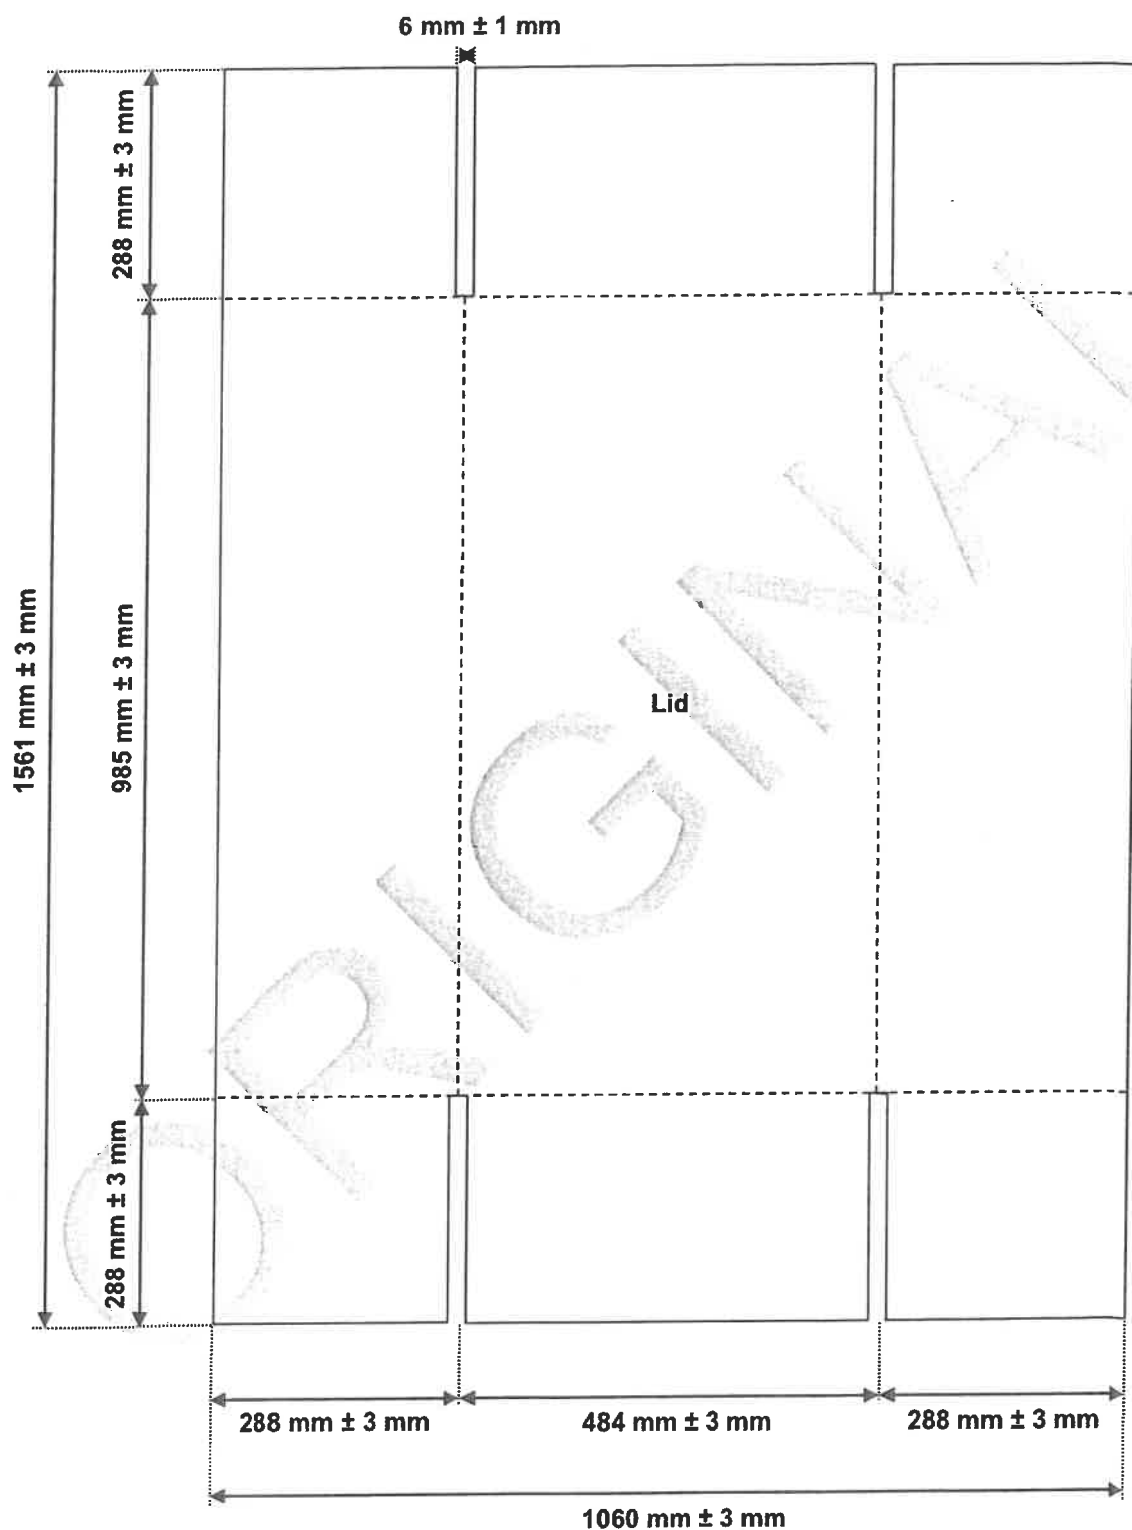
Dimensions of the lid component of the telescopic board box (flat measurements)
